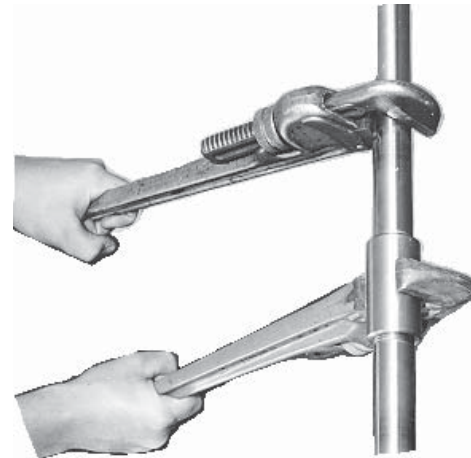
Correct Positioning of Wrenches on Shafting
